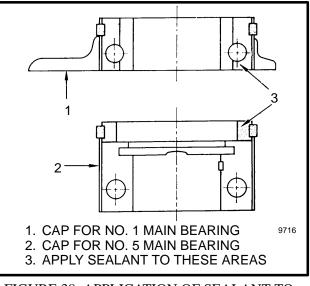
APPLICATION OF SEALANT TO THE BEARING CAPS
